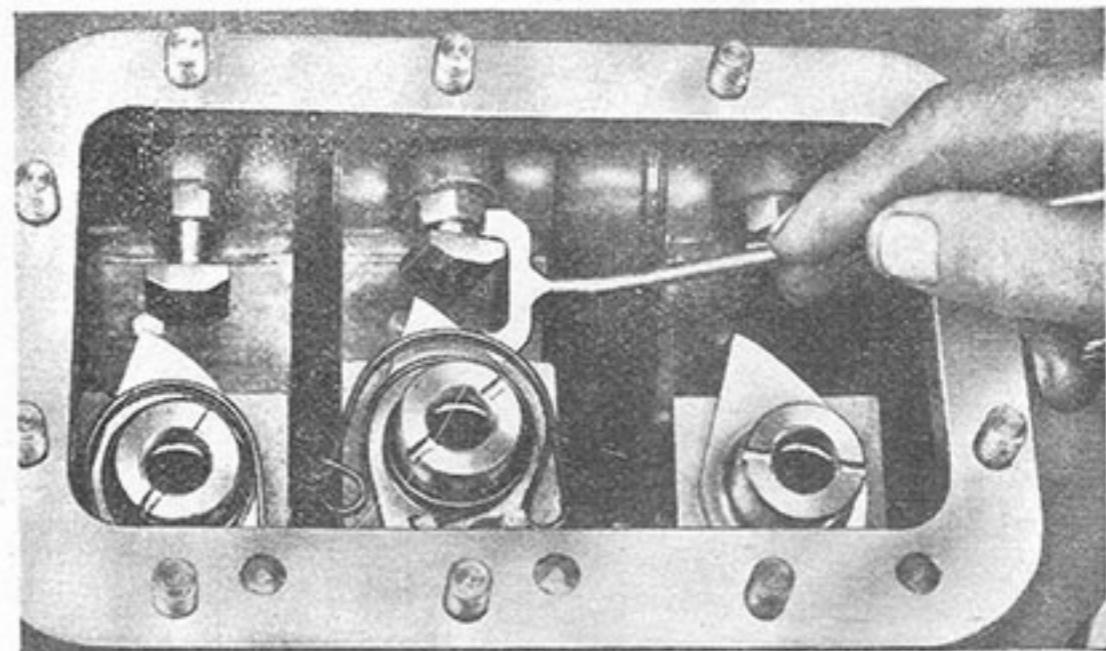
GAUGE APPLICATION. This shows where the gauge should be applied.
